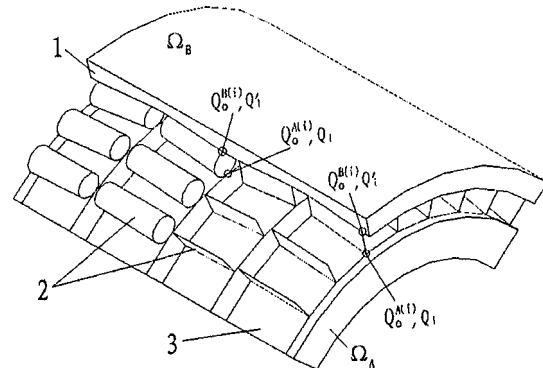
Contact conditions described by plate element. 1. Outer ring 2. Middle rollers (plate element) 3. Inner ring
